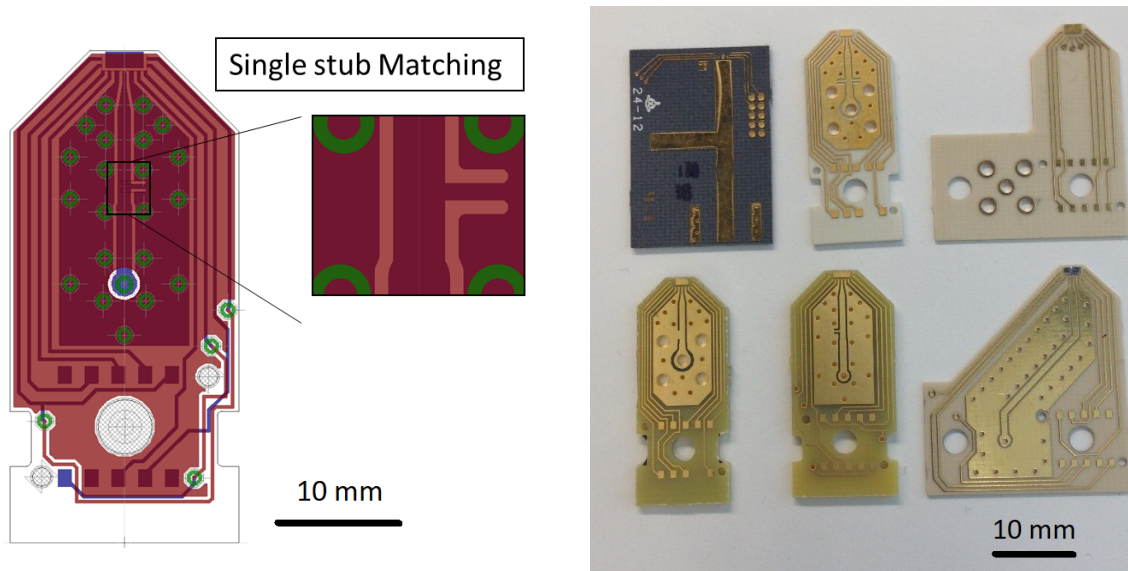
PCB layout and picture of some of manufactured PCBs.
